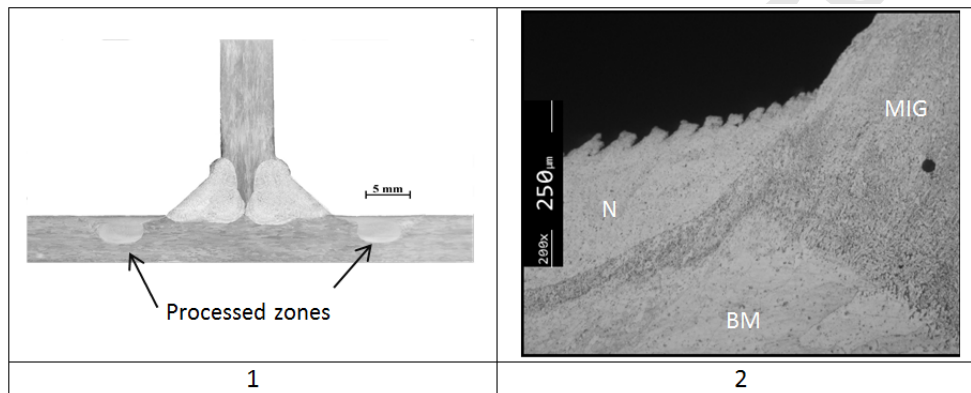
MIG weld made on AA 6082-T651 and processed with Tool A; 1) Macrograph; 2) Micrograph in the toe region.
